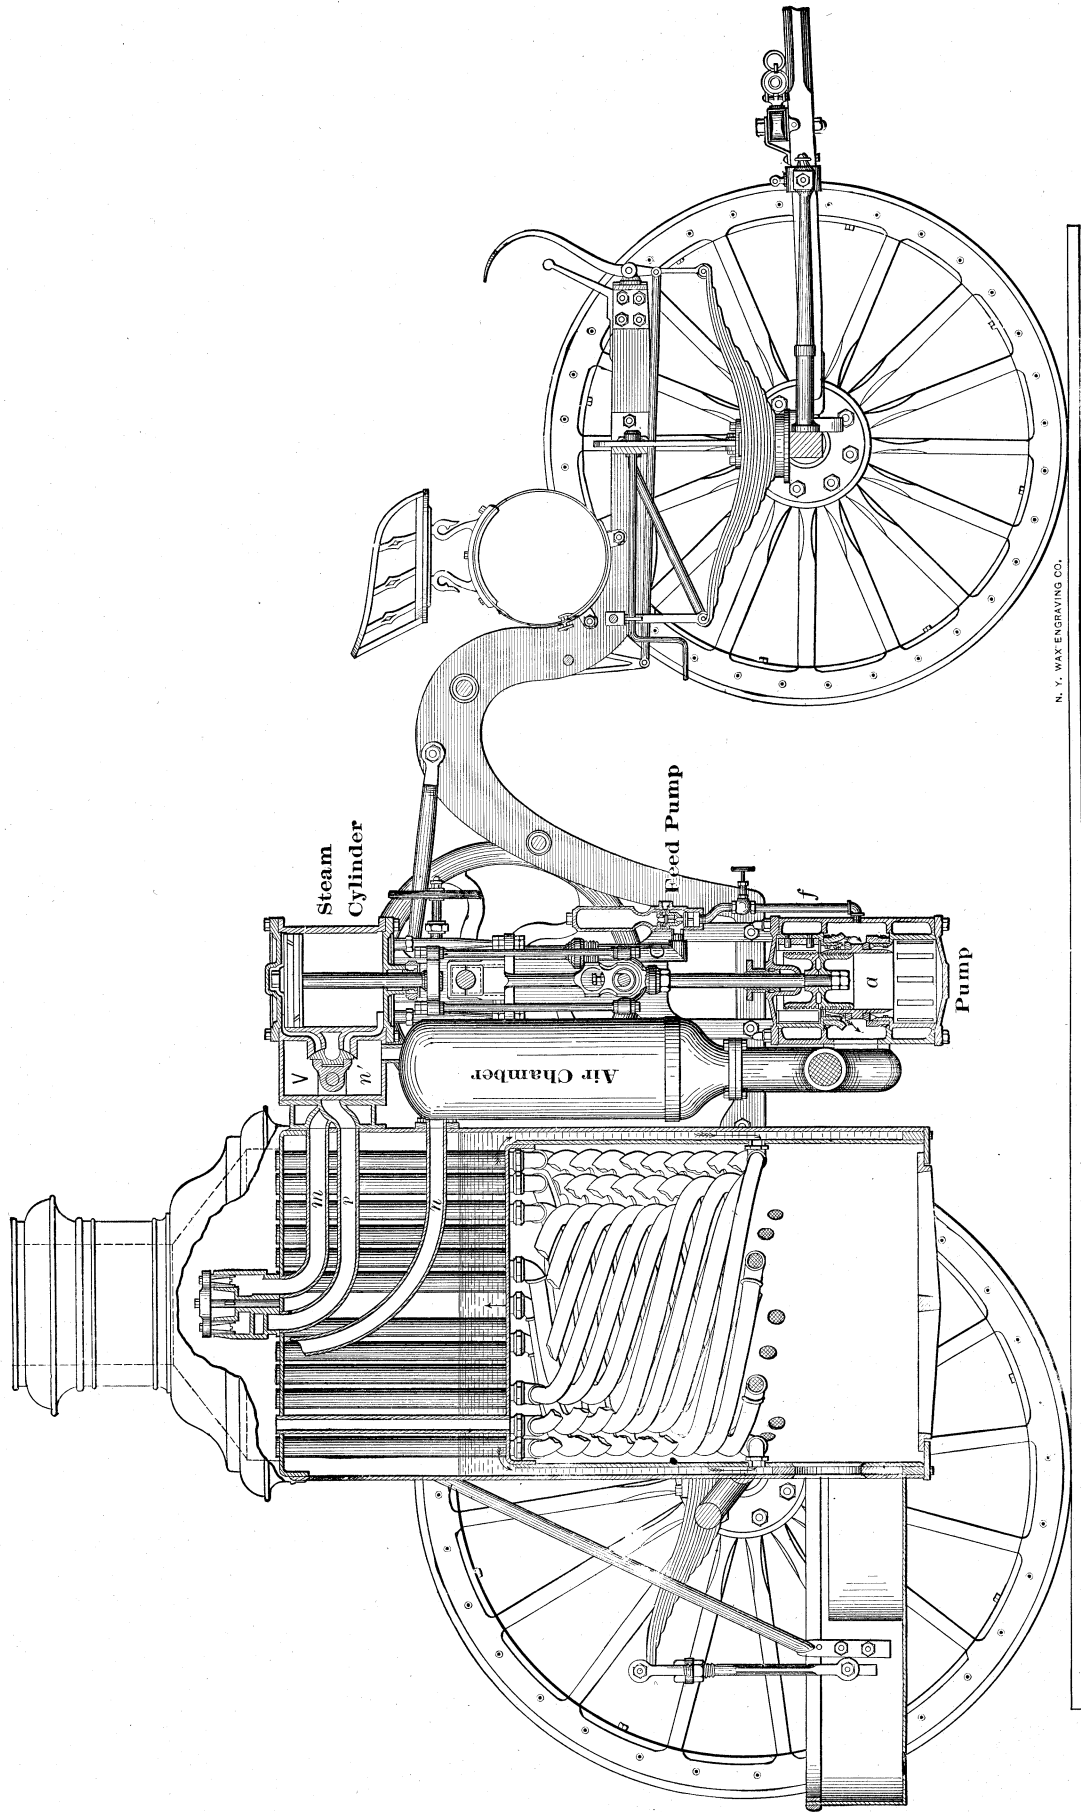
is a general view of a steam fire engine constructed by the Clapp & Jones Manufacturing Company.
